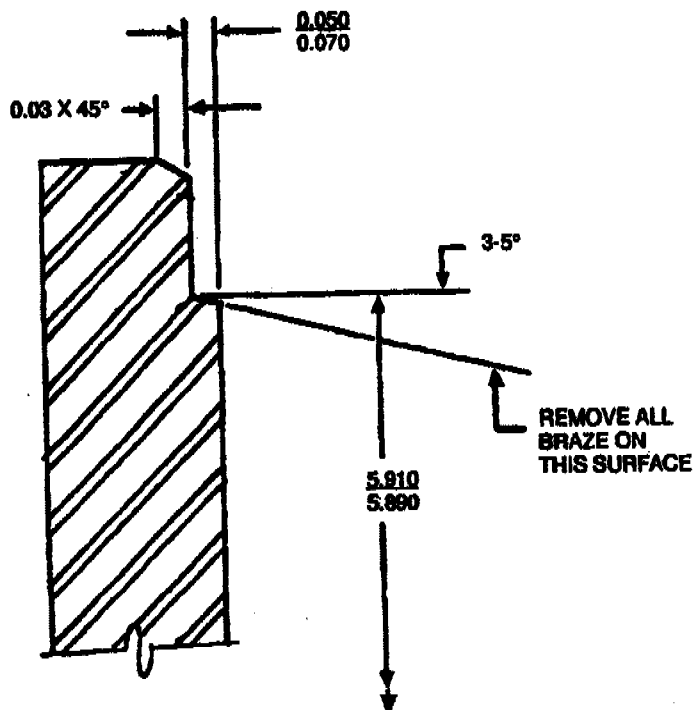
Baffle (P/N 1-140-590-04/07) Machining.
